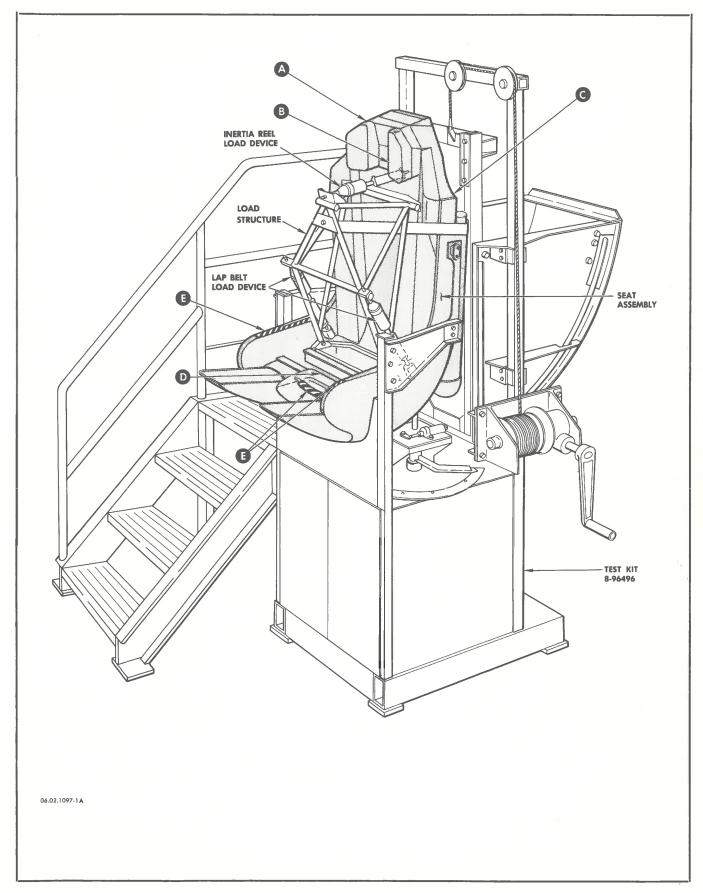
Rotational Upward Ejection Seat Operational Checkout Equipment (Sheet 1 of 3)
